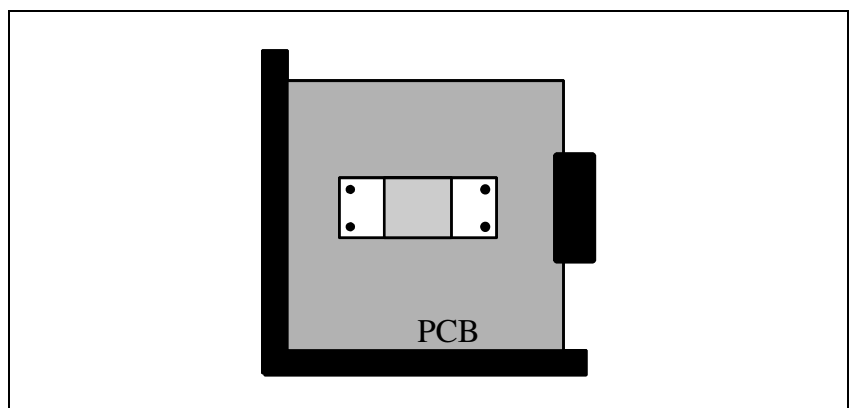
Calibration plate L-019-0633-2 on the PCB.
